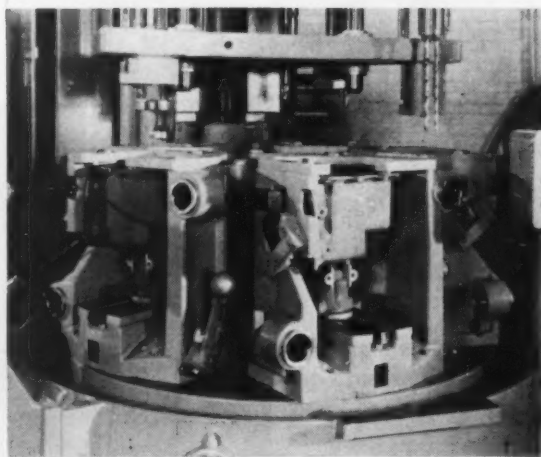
Closeup of the Cross 5-station drilling machine which drills, spot faces and reams the transmission case. The table is indexed by a fluid motor.
